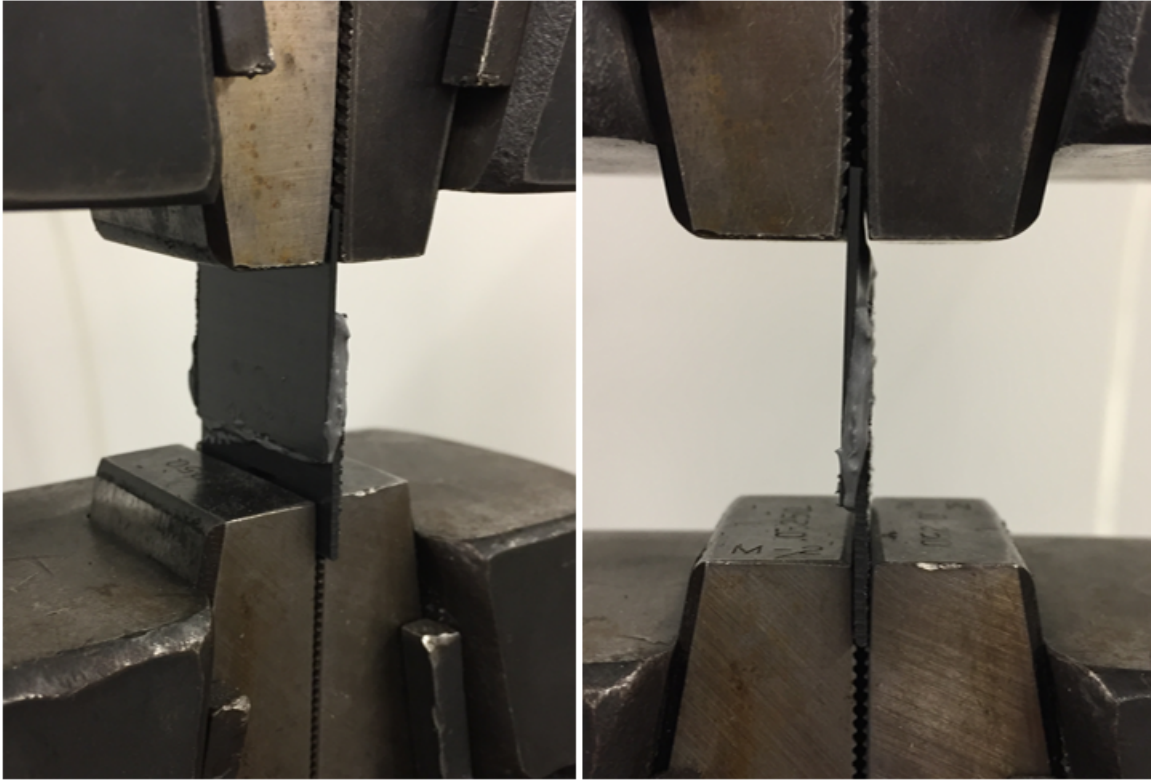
Bonded CFRTP assembly clamped into Instron prior to testing.
